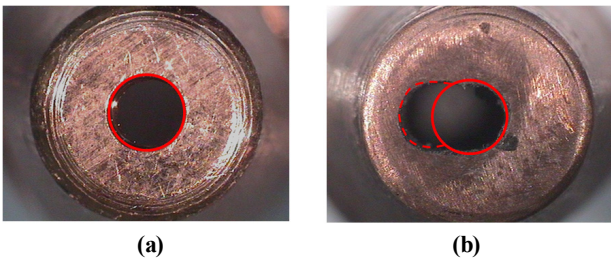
Wear of contact tip : a) area of exit hole before welding, b) area of worn-out hole after 't' hour welding
